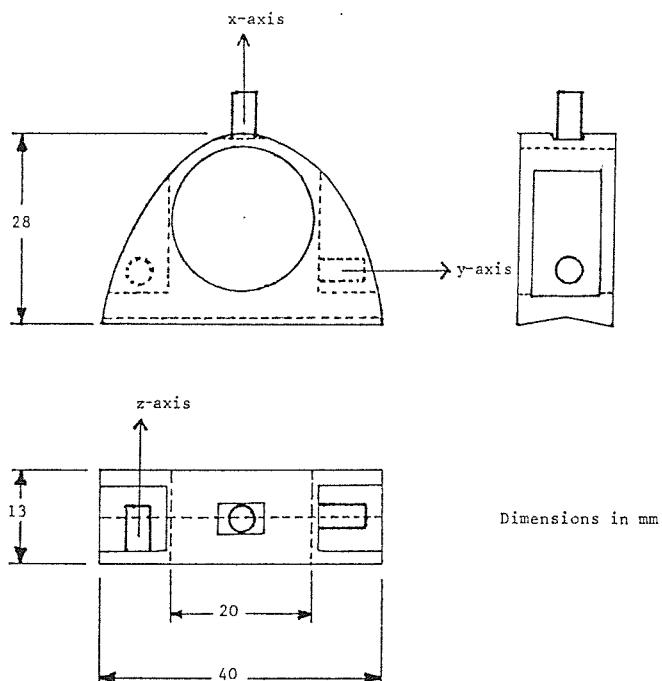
Aluminium ring for mounting accelerometers on the tool operator's finger
